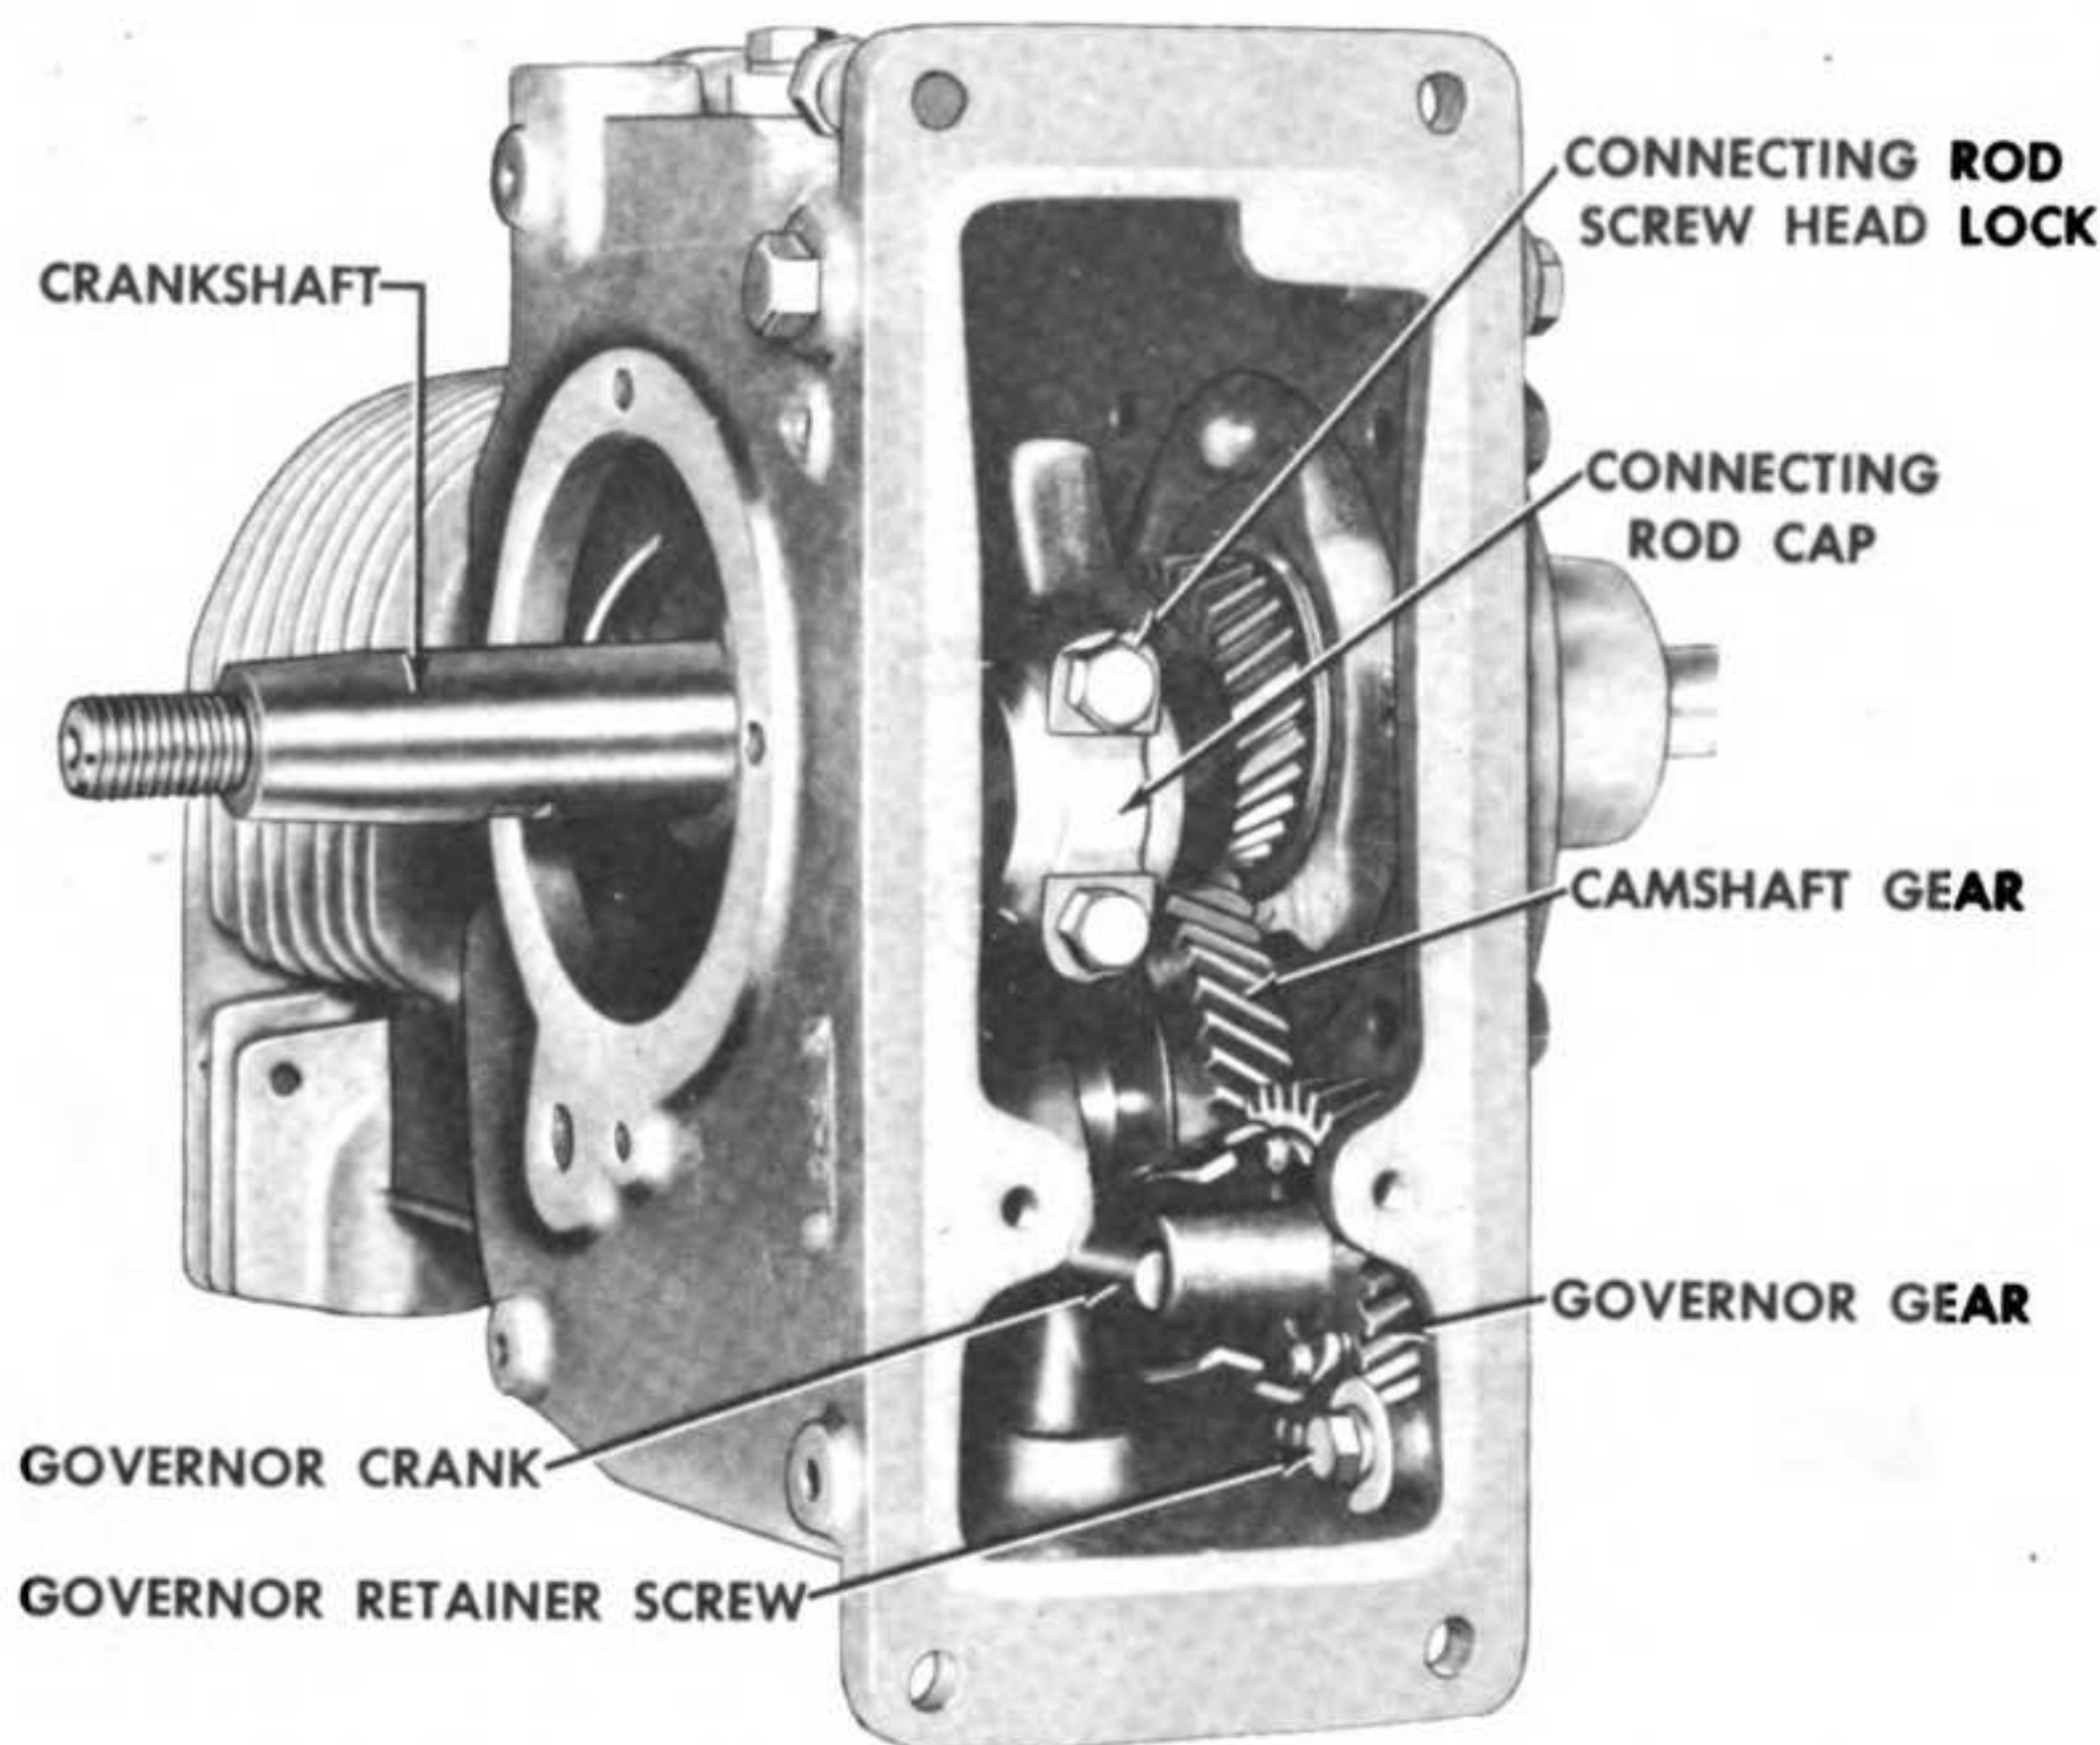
Underside of Cylinder Assembly, Oil Pump Removed
